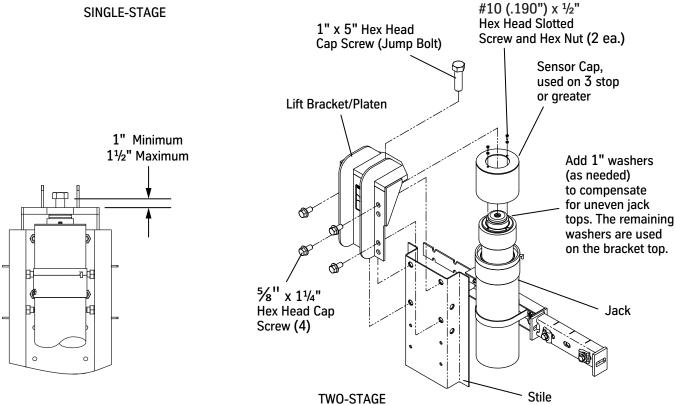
Lift Bracket/Platen Assembly Installation on Stile and Jack
